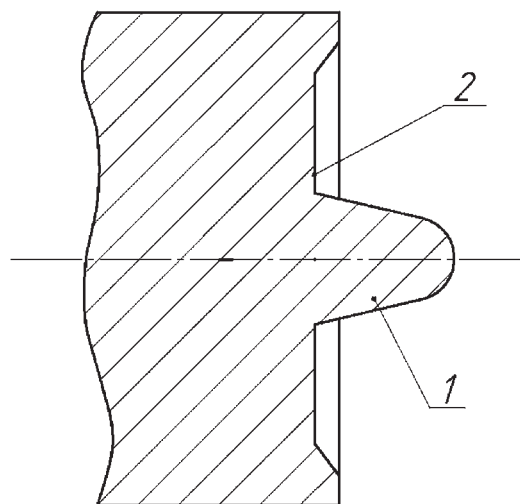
Schematic view of the active part of the working tool [2]: 1 — pin; 2 — shoulder
